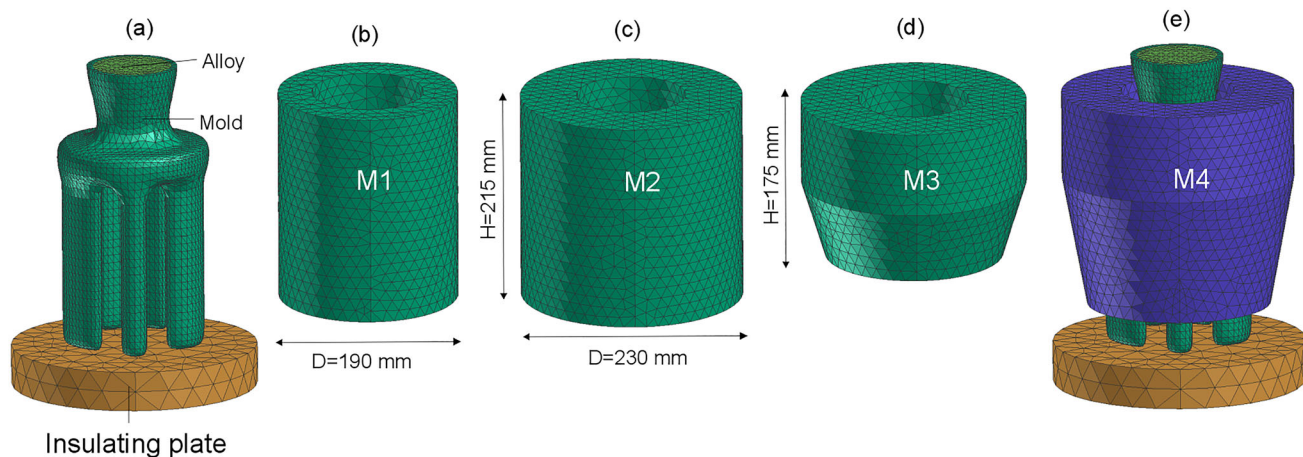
Geometric model of mold with insulating plate (a) and various shapes of insulating modules: (b) M1, (c) M2, (d) M3, (e) M4.
